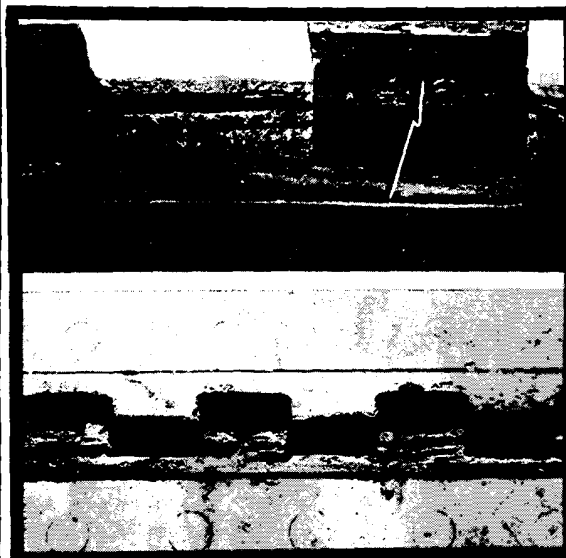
HINGE FAILURE CAUSED BY CORROSION
